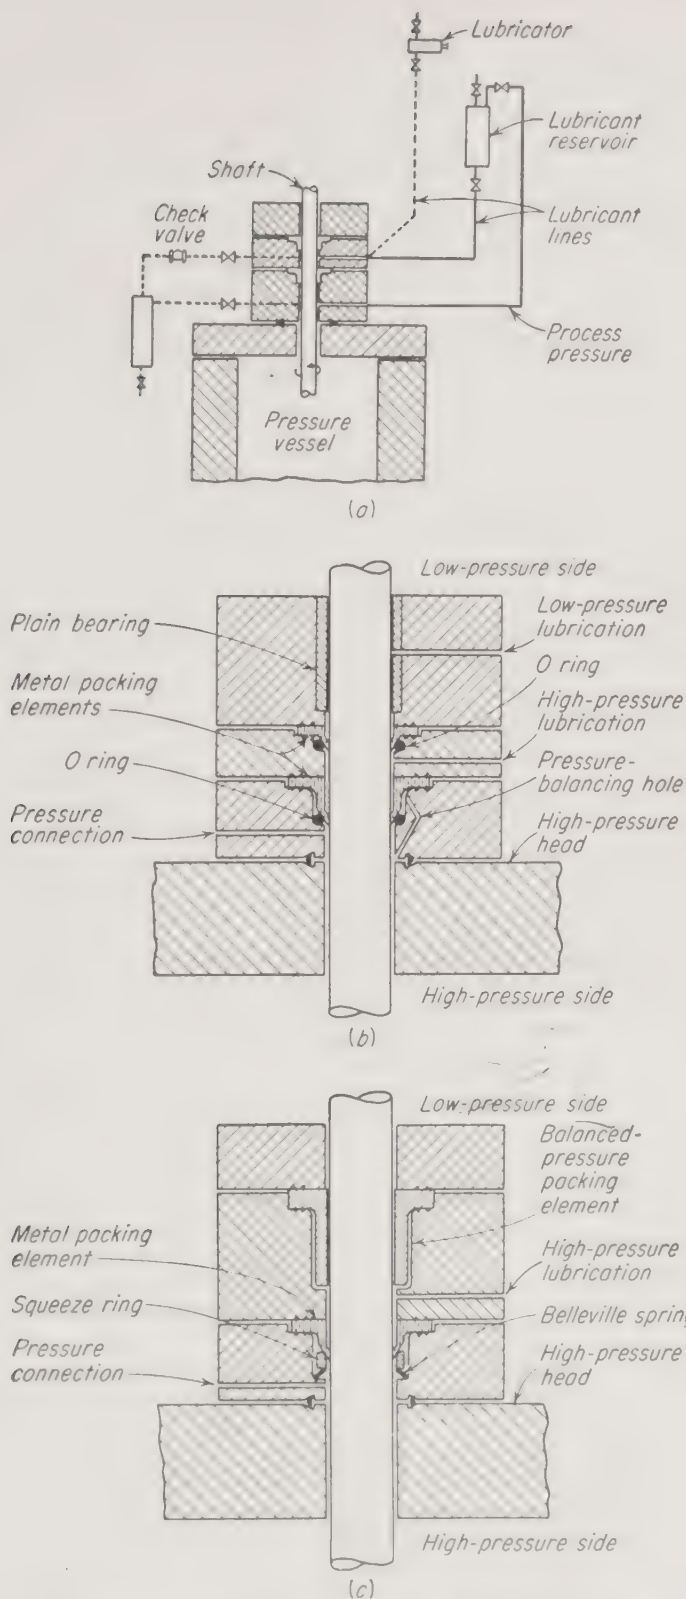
Seals for rotating shafts. [From Waller Coopey, *Chem. Eng.*, 58(7):116 and 58(11):164 (1951).] (a) Lubricating systems. (b) O-ring seal. (c) Spring seal.
